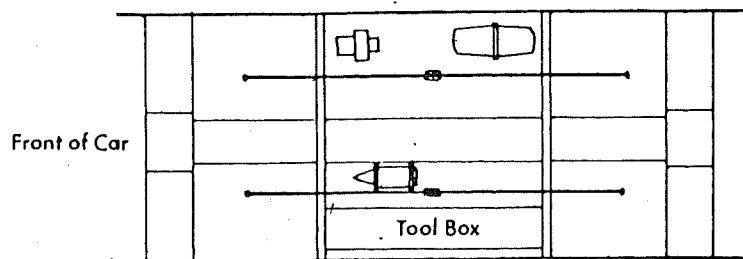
ARRANGEMENT OF "AB" BRAKE EQUIPMENT WITH 1 TOOL BOX
